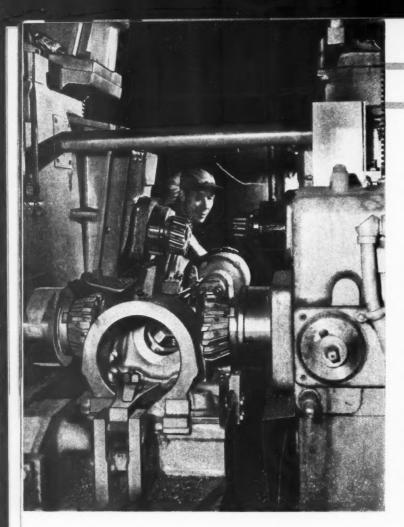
Two mounting pads, the speedometerhole pad, and the governor-cover pad on the transmission case are face-milled in one set-up on a four-head milling machine
